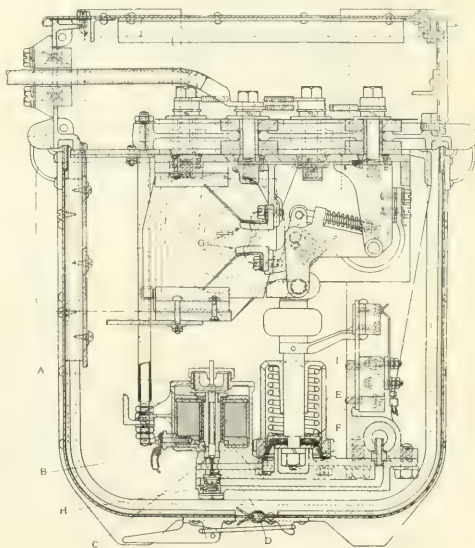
CROSS-SECTION OF UNIT CONTROL SWITCH
